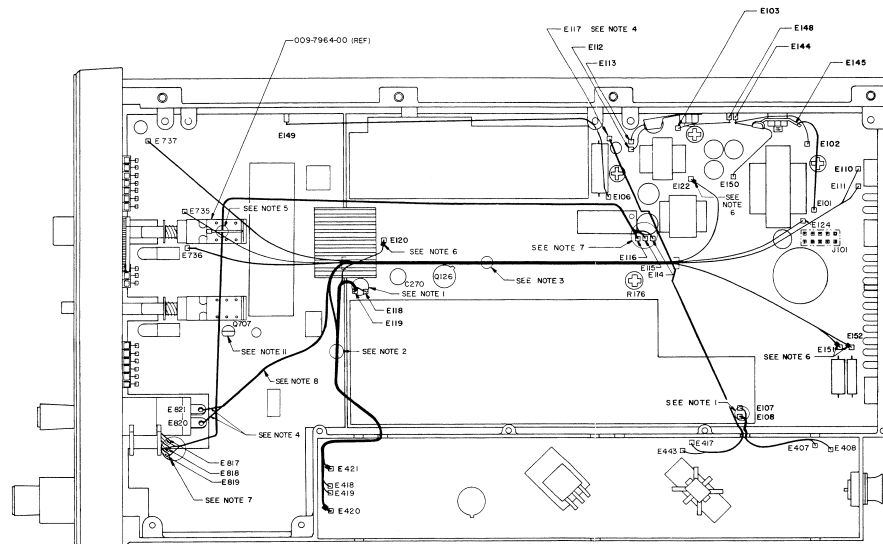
KY 96A Final Assembly (Sht 2 of 2) (Dwg No 300-04268-0000, Rev AG, Sht 2)
